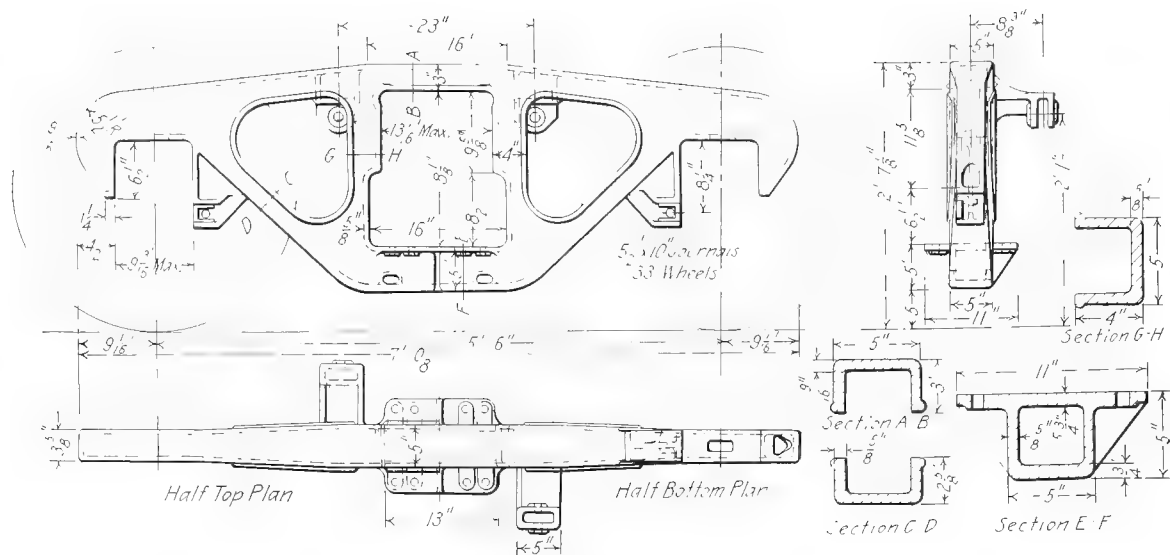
Buckeye Pedestal Channel Section Side Frame for 50-Ton Capacity Freight Cars. Buckeye Steel Castings Company.
